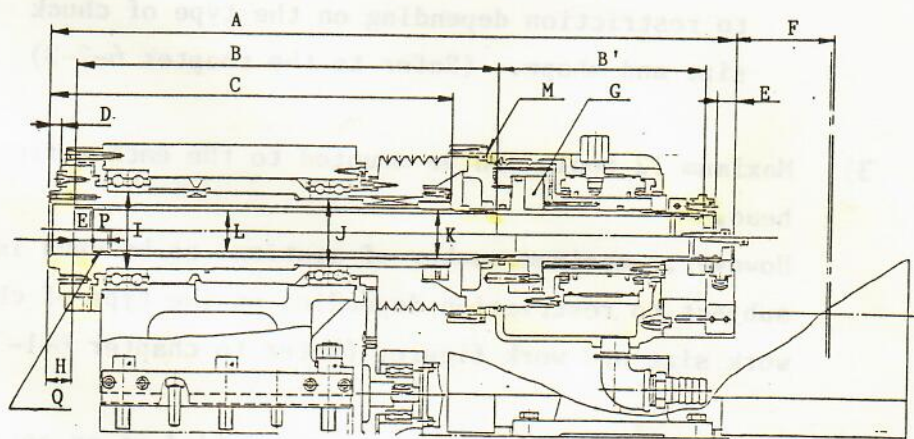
B TW-20 RIGHT SPINDLE DIMENSIONS
